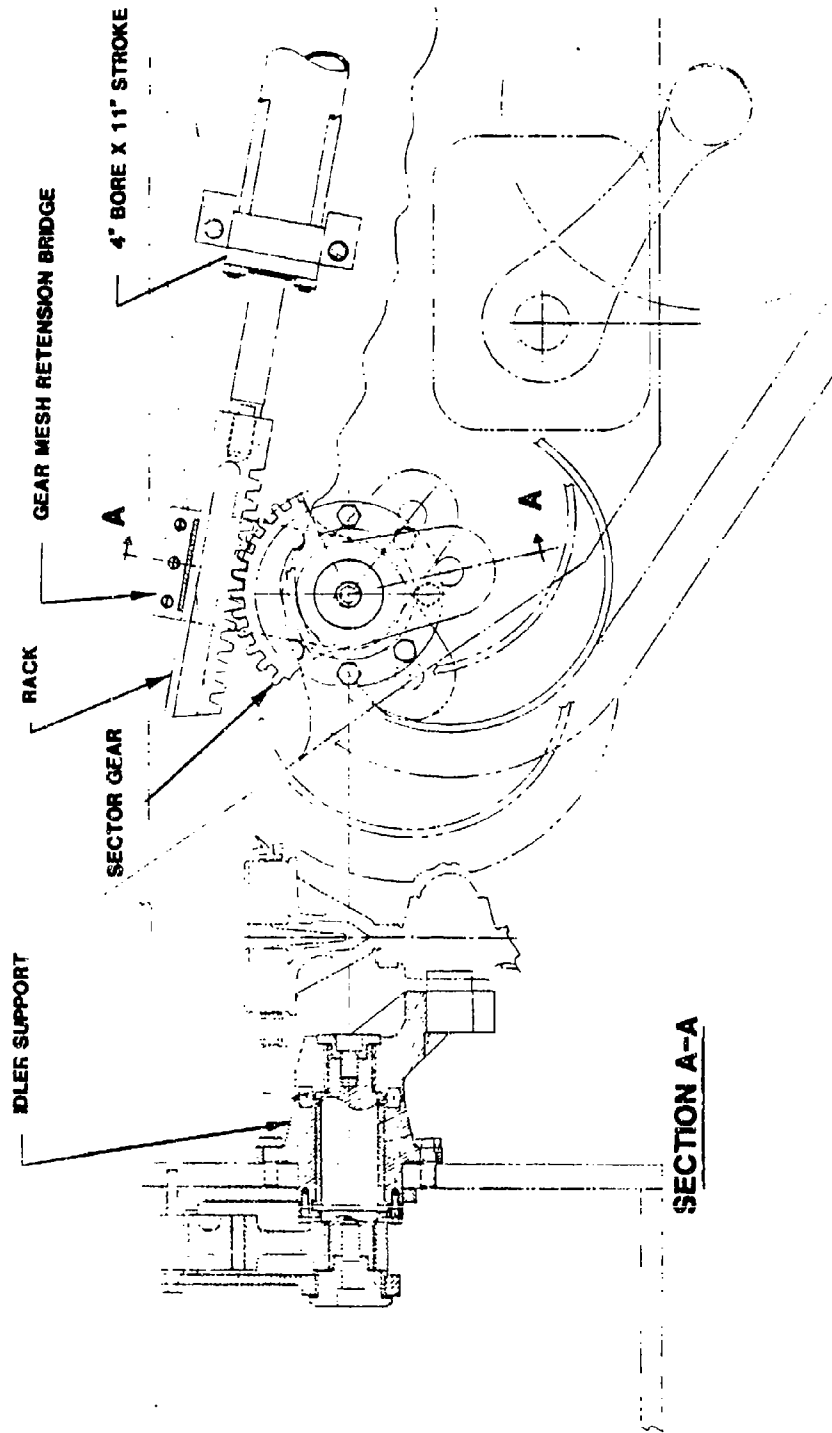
Hull Mounted Hydraulic Cylinder: Sector Gear
